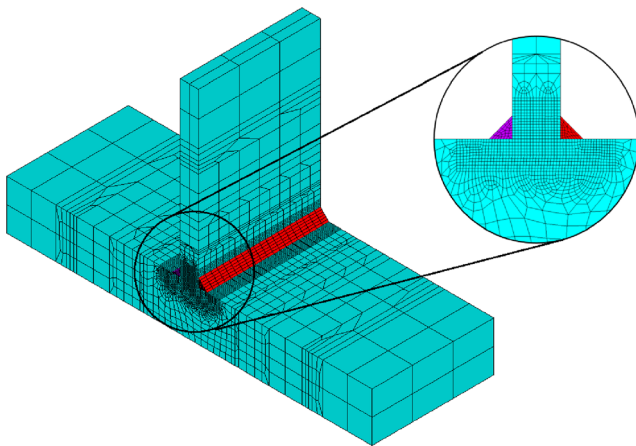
Finite element model of a T-joint with double-sided fillet weld
